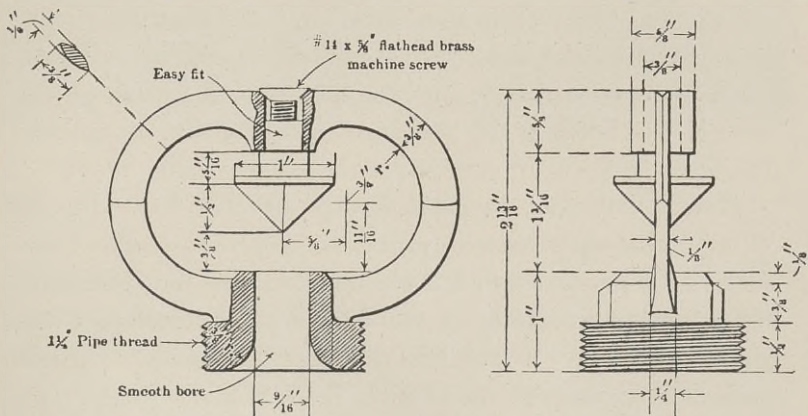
B.—Sprinkling Nozzles Adopted for Sewage Works at Columbus, Ohio.
